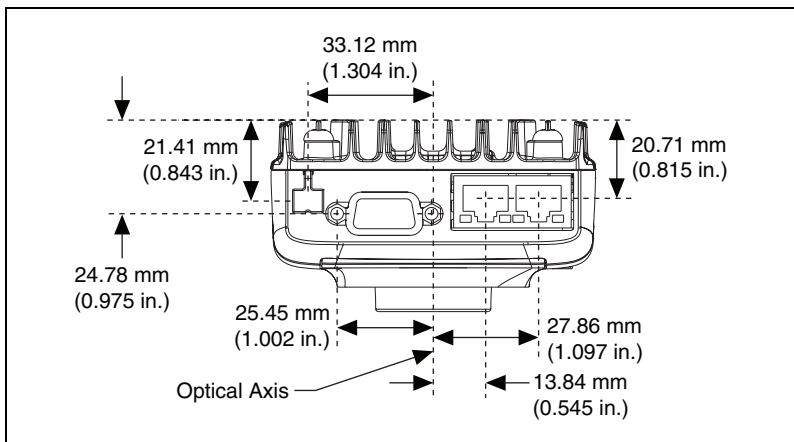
Bottom View of the NI 17xx with Dimensions
